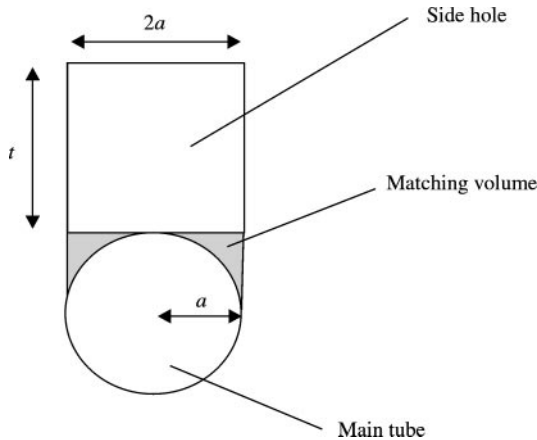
Dimensions definition for a side hole in a cylindrical tube.
